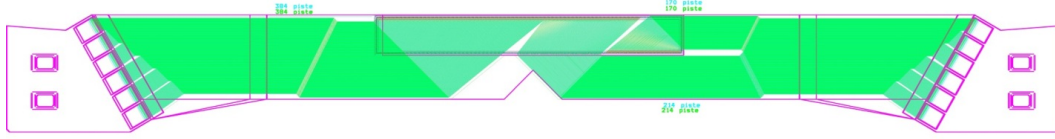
CAD drawing of the Layer0 module. *(Insert a ruler in the picture)
